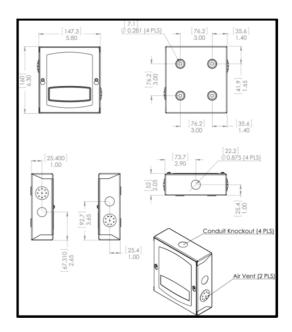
Screw-Down Front Panel Enclosure Dimensions (K-O2-Sx)
